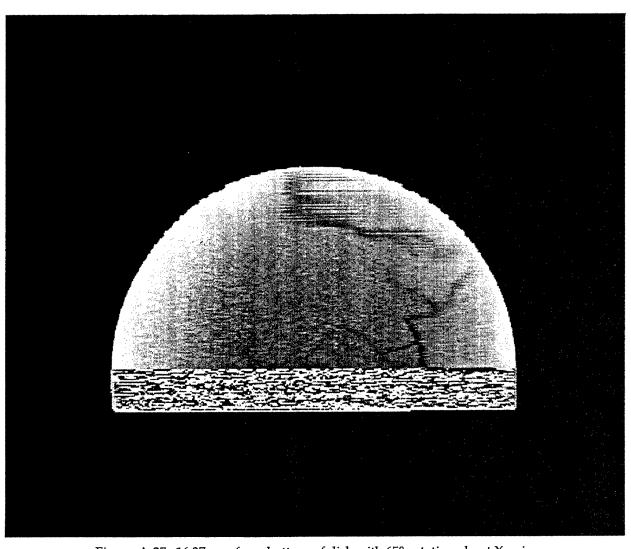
16.27 mm from bottom of disk with 65° rotation about X-axis.
